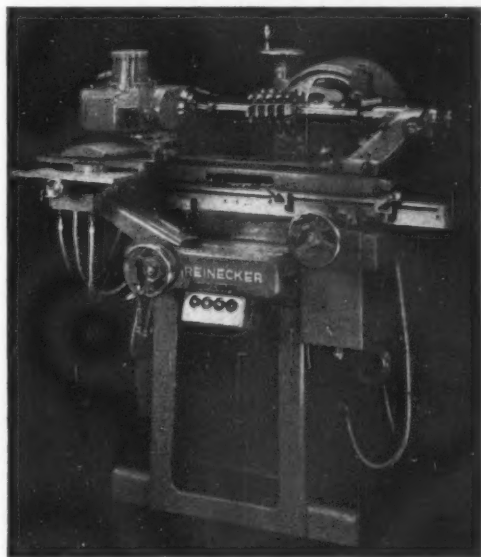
A General View of the New Reinecker WZS 5 Universal Tool and Cutter Grinder, Fitted with an Electrically-operated Dividing Head
